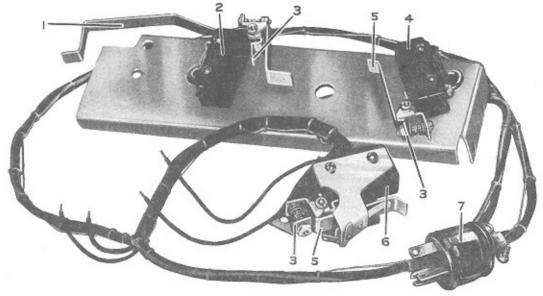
No. 11698-A Cam Shaft Support Assembly
